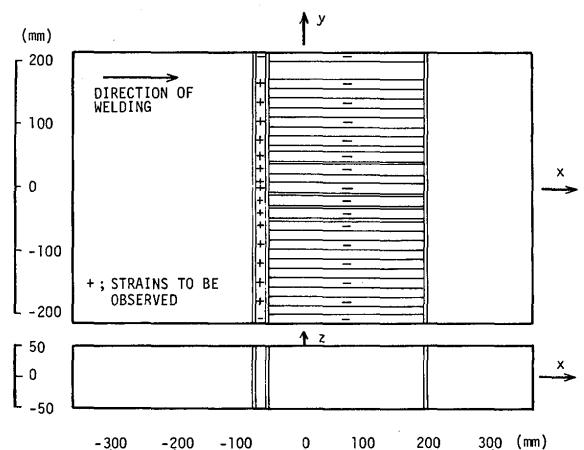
Locations of observing points on the top and bottom surfaces of R -specimen
